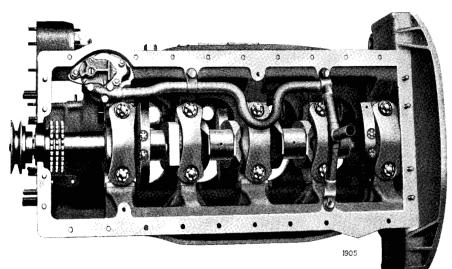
VIEW OF CRANKCASE WITH BASE-CHAMBER REMOVED
